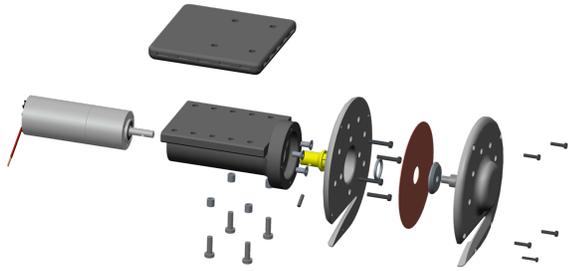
Exploded view of the cutting end-effector. The cutter is attached to the robot via a flange. The actuation is composed of an electric motor with a planetary gearbox. The circular blade, with a diameter of 60 mm and a thickness of 0.6 mm, is protected by a frame.
